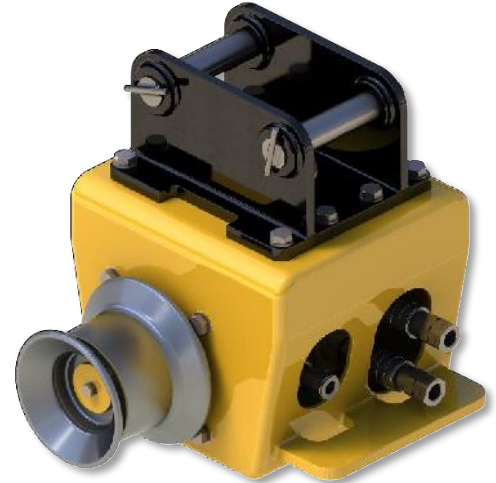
Quick Hitch Capstan shown with optional mount assembly
